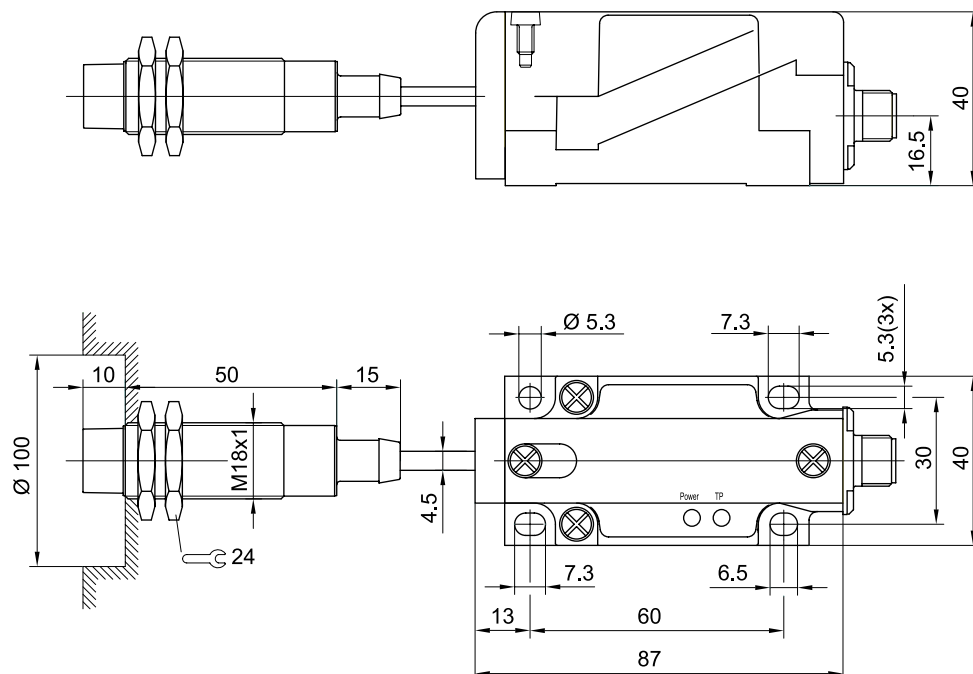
BIS L-400-043-002-02-S115 processor dimensions
